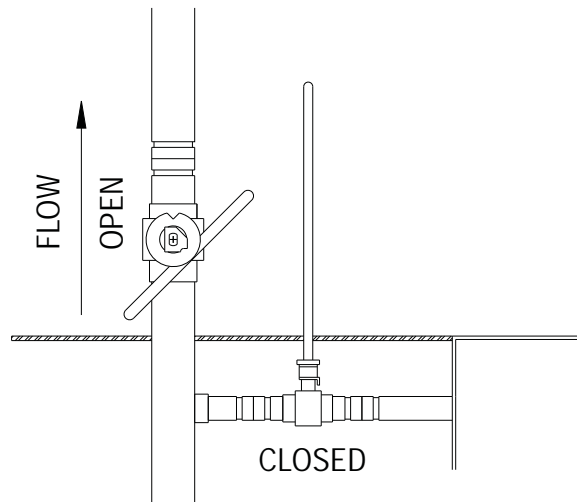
Discharge Through Boom or Extension Hose Through Boom
